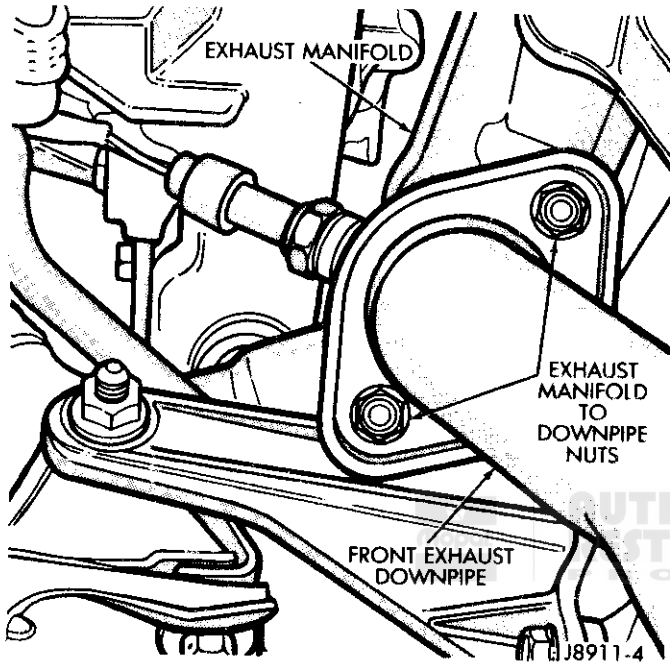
Exhaust Downpipe-to-Exhaust Manifold Nuts
